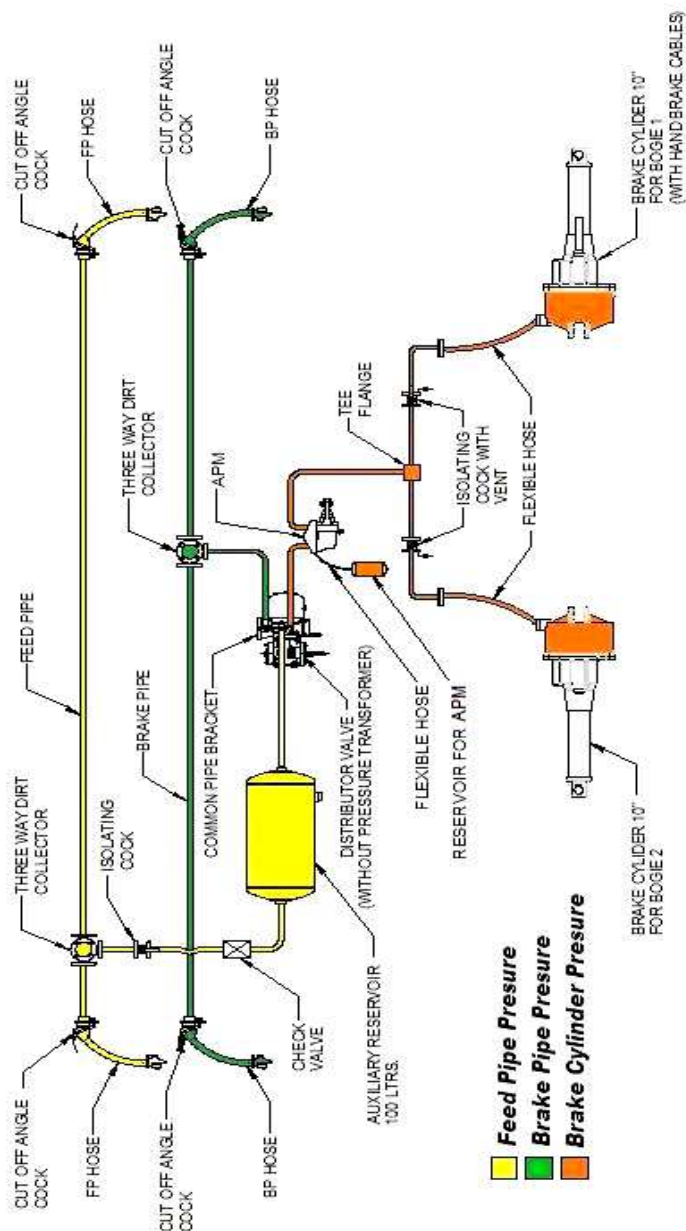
LAYOUT OF TWIN PIPE AIR BRAKE SYSTEM
